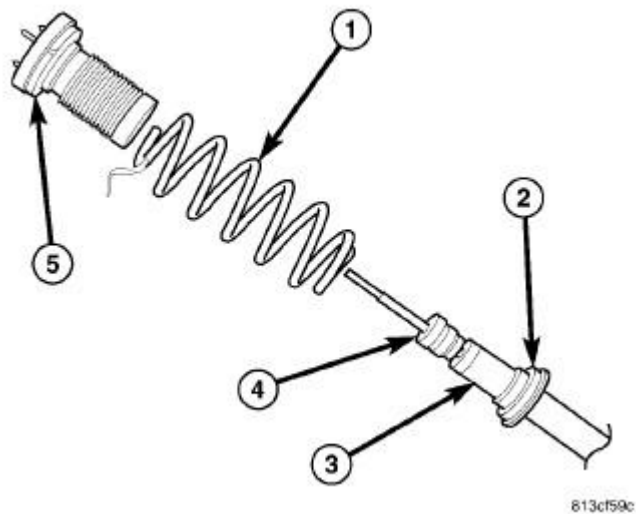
SHOCK ASSEMBLY EXPLODED VIEW
